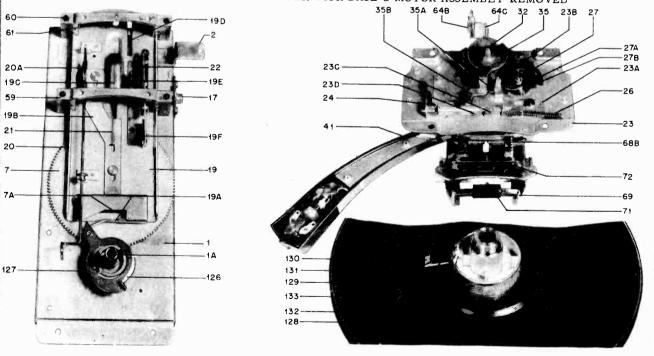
DISASSEMBLED VIEW OF RECORD CHANGER MECHANISM
